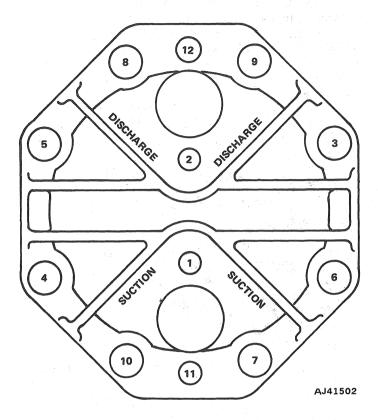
E-22 Compressor Head Capscrew Tightening Sequence
